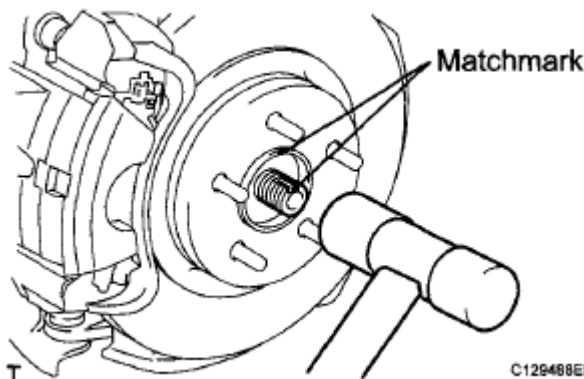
Putting Matchmarks On Drive Shaft And Axle Hub
